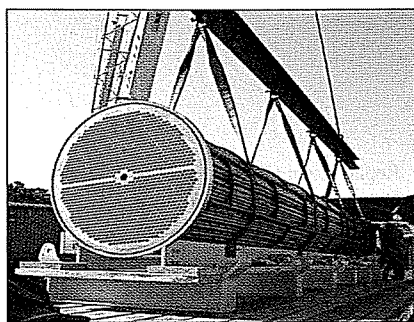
Proper rigging for lifting main turbine lube oil cooler bundle
